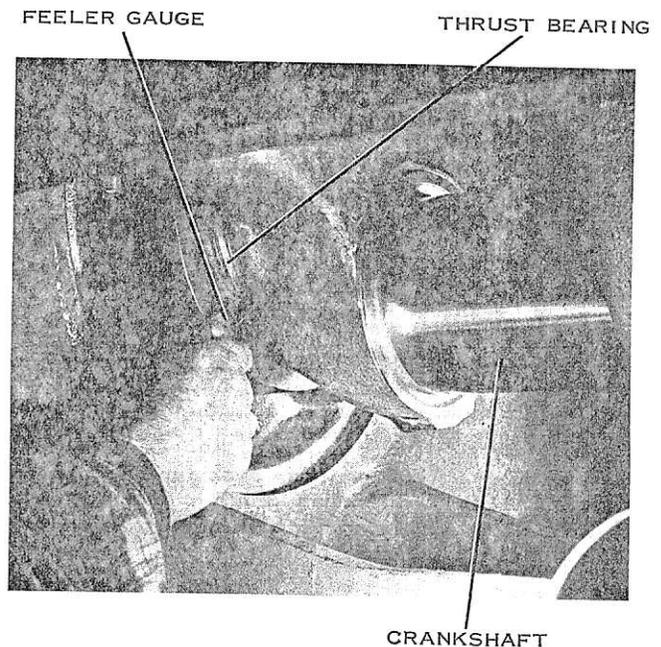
Alternate Method of Checking Thrust Bearing Clearance
